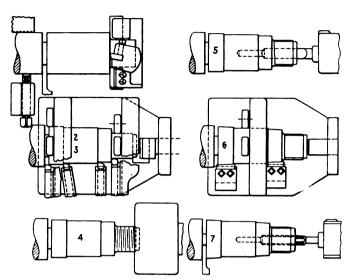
Tooling Arrangement for Finishing Crosshead Wrist Pins
